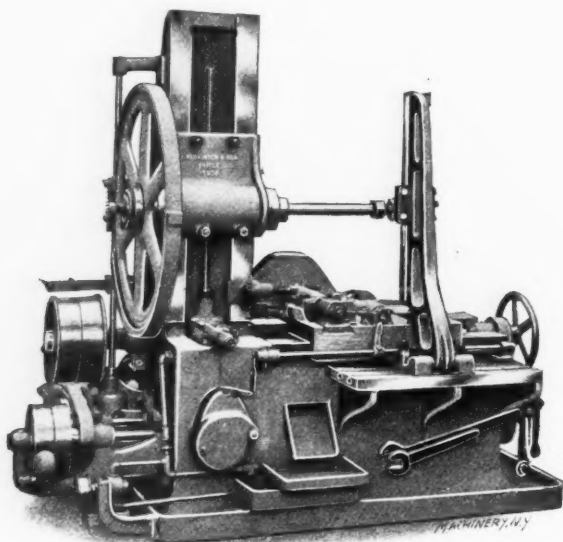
An Example of English Design, built by J. Parkinson & Son.
